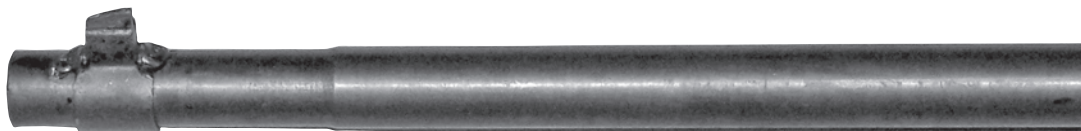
Typical of VG 98s is the front sight with no provision for any type of adjustment and arc welded to the barrel which was 20 3/4 inches long, shorter than the standard 98.
